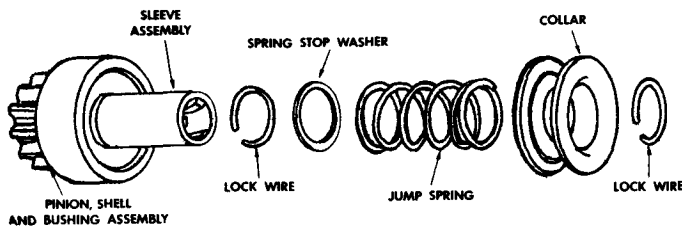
Disassembled view of early type intermediate duty sprag clutch drive assembly.
